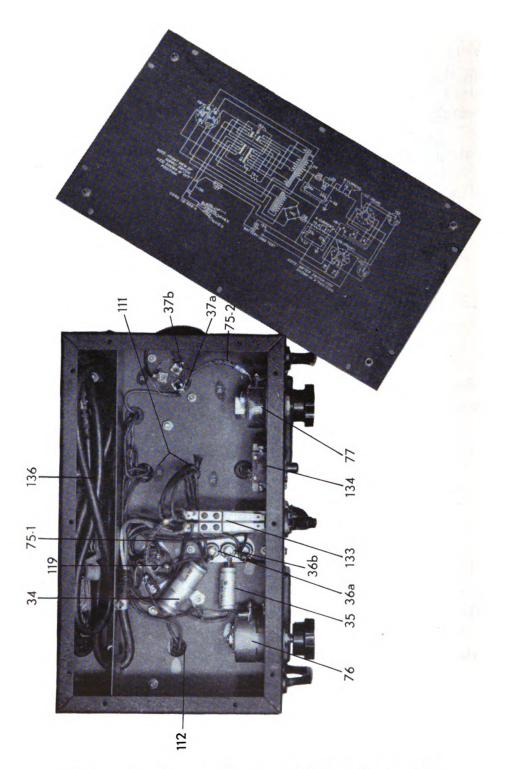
Battery Charger PE-128-A, Bottom View With Bottom Plate Removed
